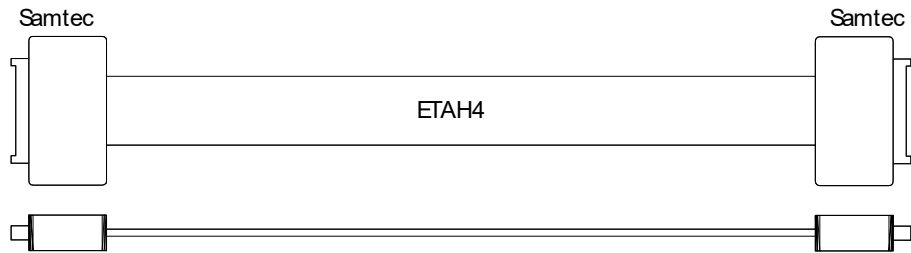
ETAH4 XETK-V2.0B - ECU Adapter Cable
